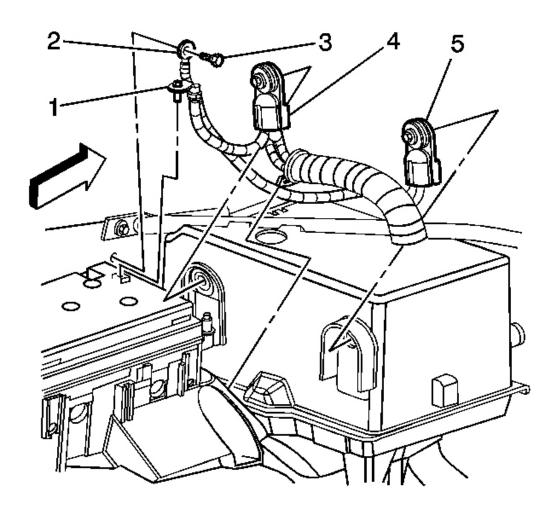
Identifying Battery Cable Components Courtesy of GENERAL MOTORS CORP.
